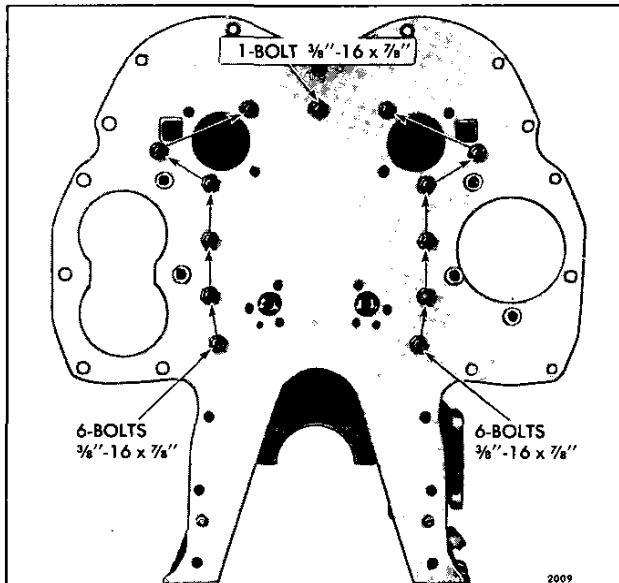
Cylinder Block Rear End Plate Mounting (3-53 Engine)
